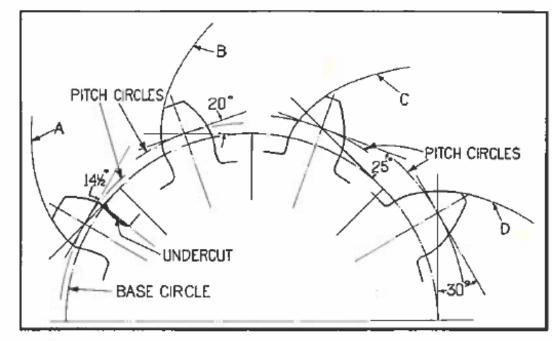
Diagram Illustrating that Pressure Angle is Governed by Portion of Involute Used for Gear Tooth.
